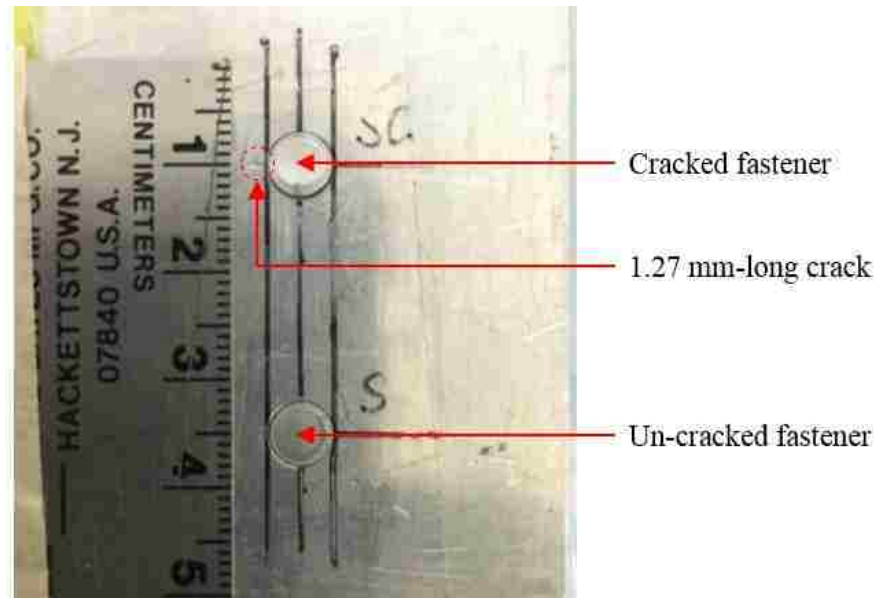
Close-up look of 1.27 mm-long surface-breaking crack initiated around a fastener head of 6.35 mm in diameter.
